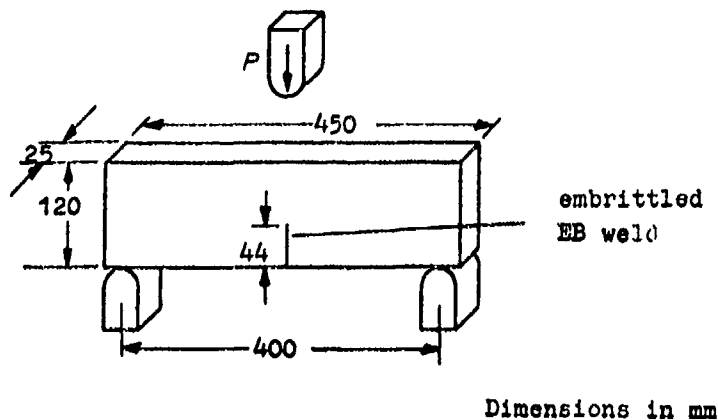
Dynamic tear test specimen for testing a 25 mm thick plate
